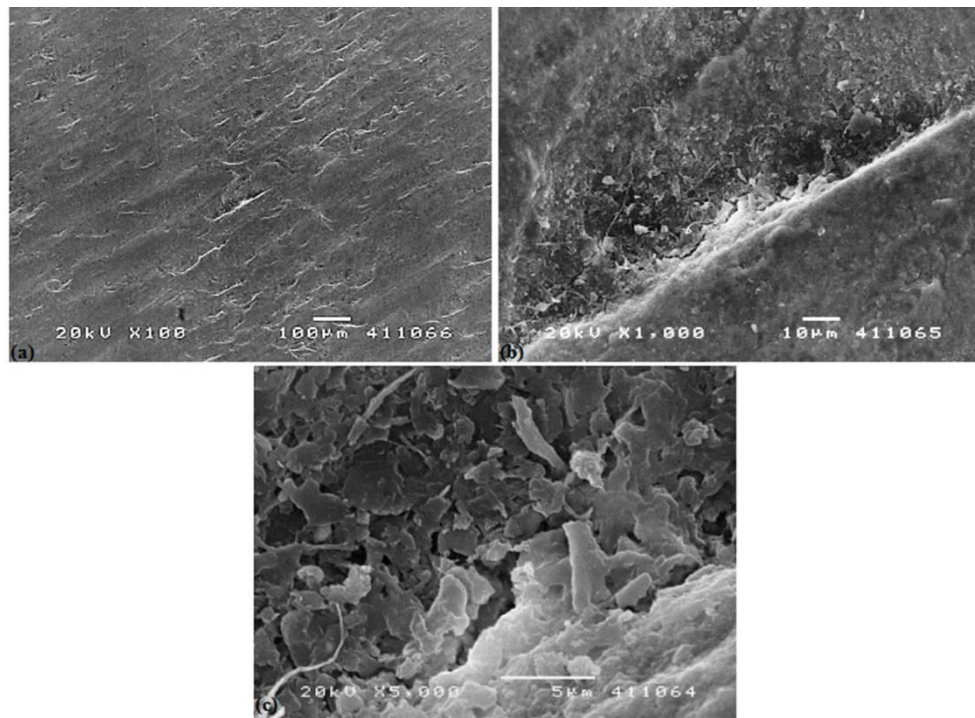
SEM micrographs of the CAD/CAM pre-sintered Y-TZP surface showing (a) milling traces associated with plastic deformation and fractures, (b) details of the fractured area containing micro-chips and cracks, and (c) details of fracture morphology revealing the agglomeration of fractured chips by intragranular or transgranular fracture.
